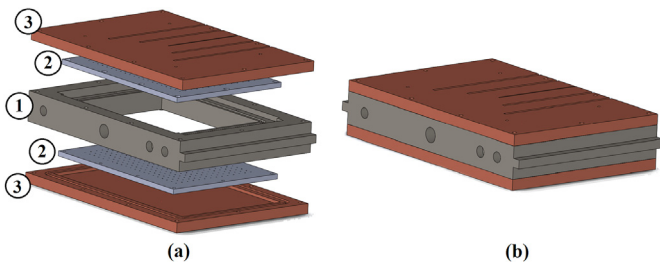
(a) Exploded view of the assembly of the jet impingement system: 1. chamber housing, 2. nozzle plate, 3. impingement plate. (b) Assembled jet impingement chamber.
